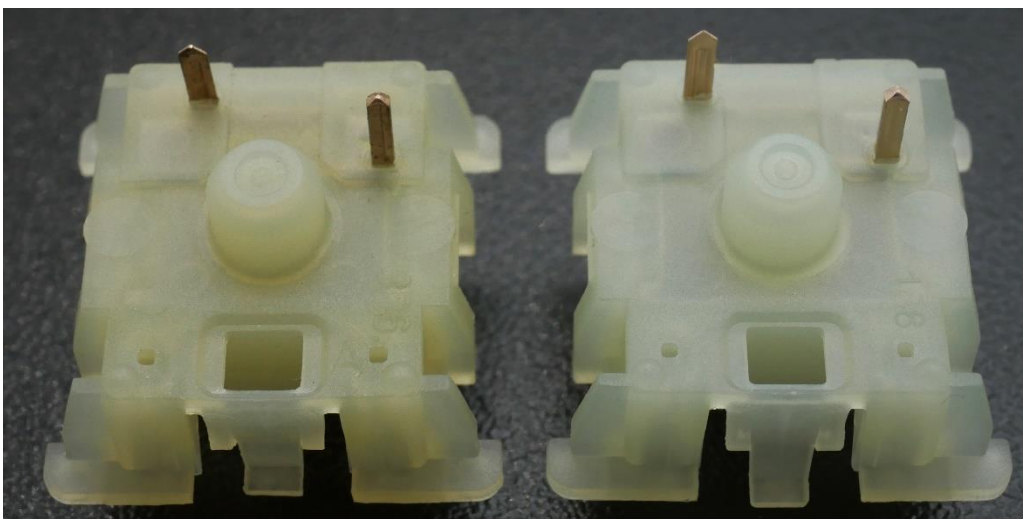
Bottom housing external design for MX (Left) and MX2A (Right) RGB switches showing subtle differences in color and mold markings in bottom right-hand corner.
